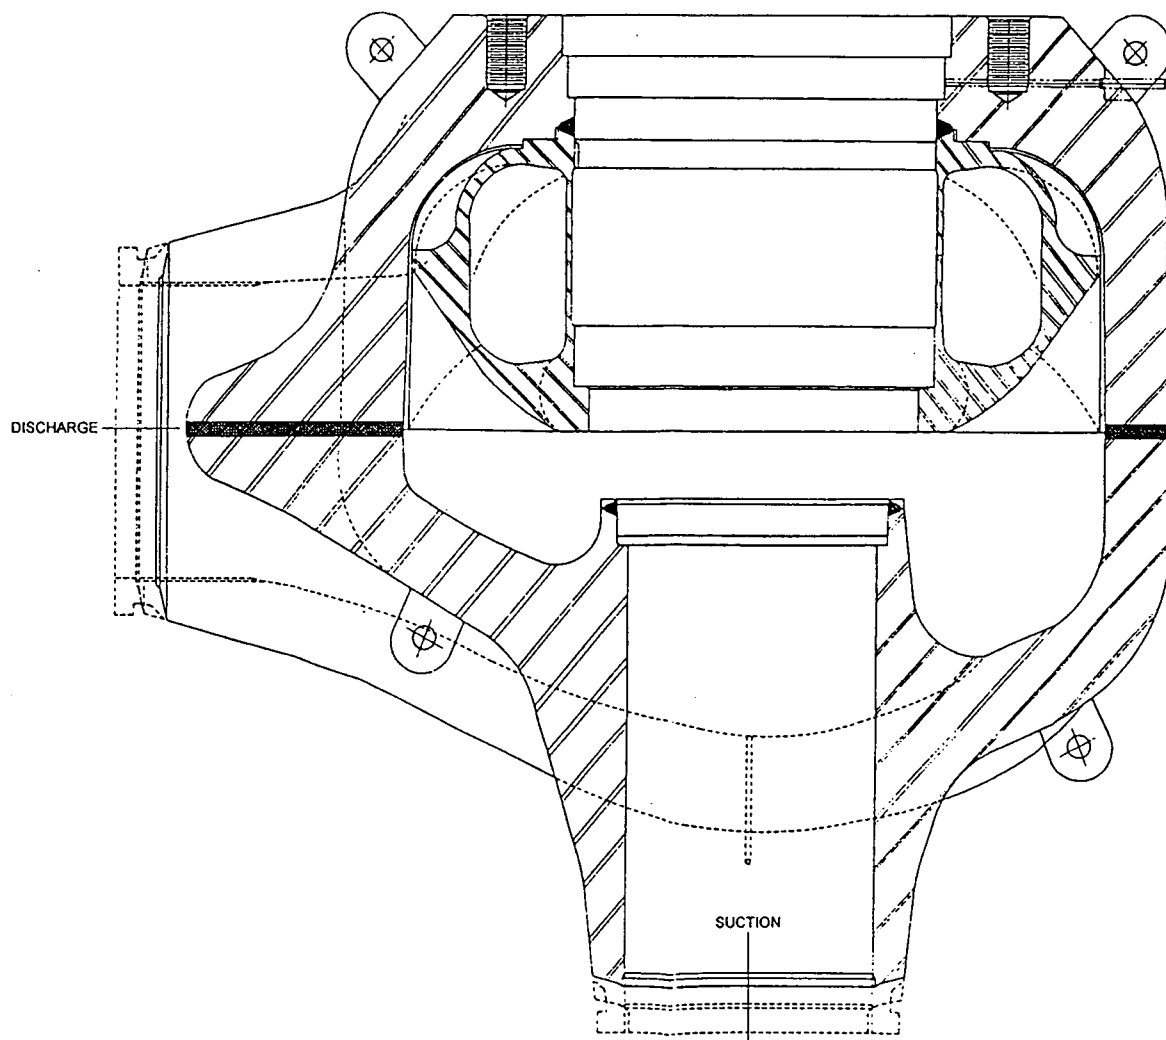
Oconee Unit 3 Reactor Coolant Pump Assembly
